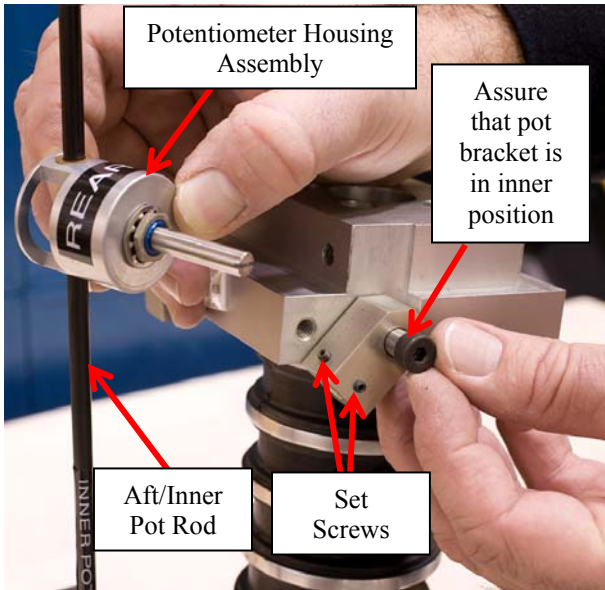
Assembling chest rotary potentiometer and potentiometer housing assembly
